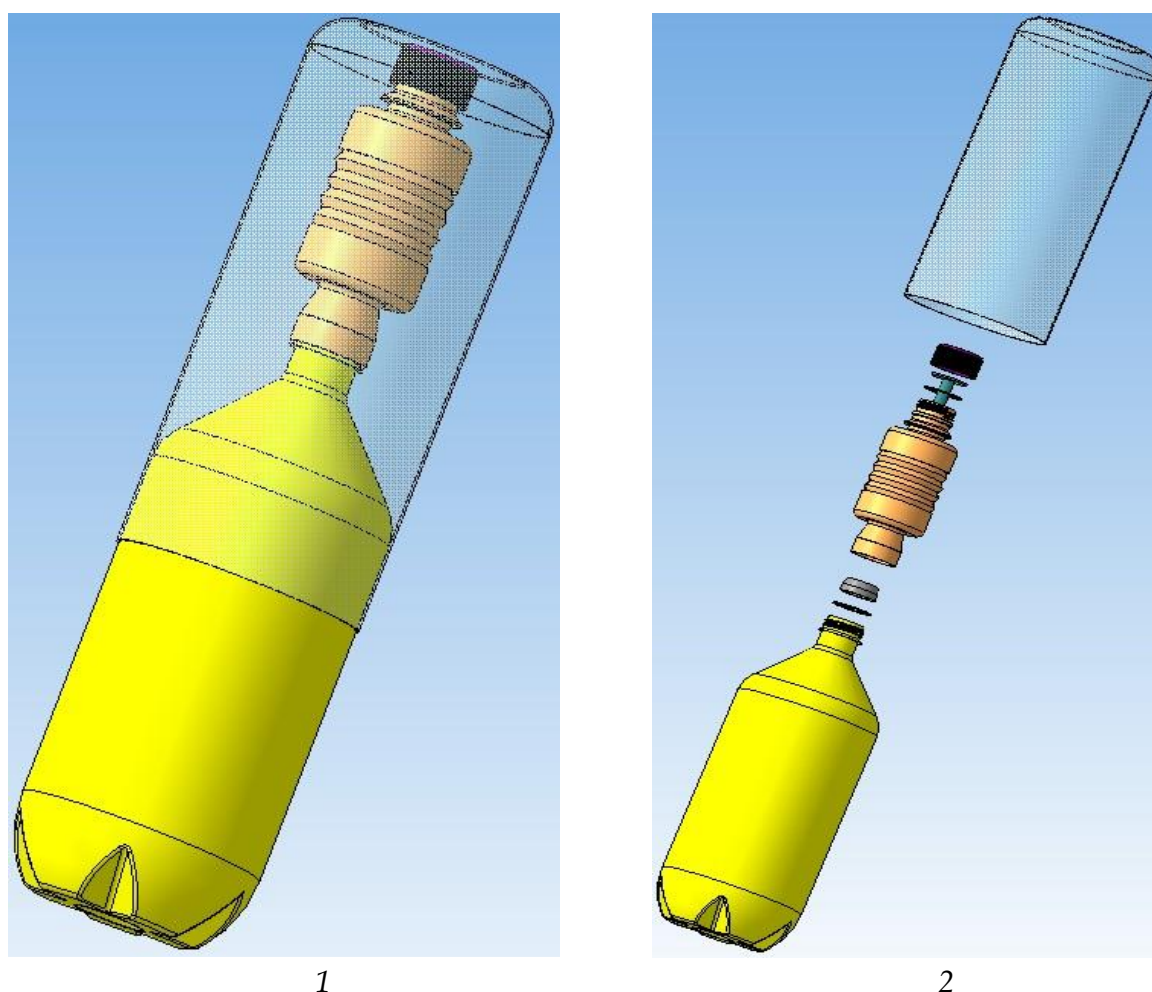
General view of the container for the separate storage of two components with a protective glass: 1 – assembled view, 2 – disassembled view
